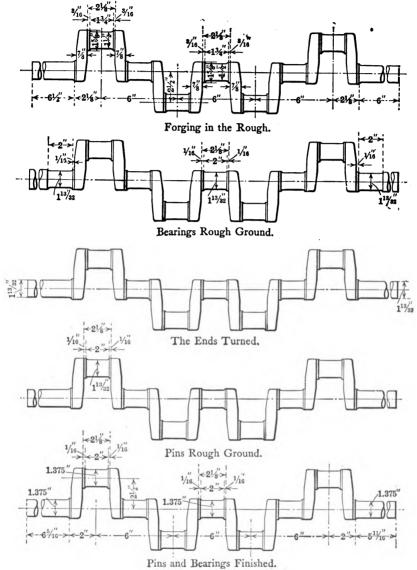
Stages in the grinding of an automobile crankshaft.
